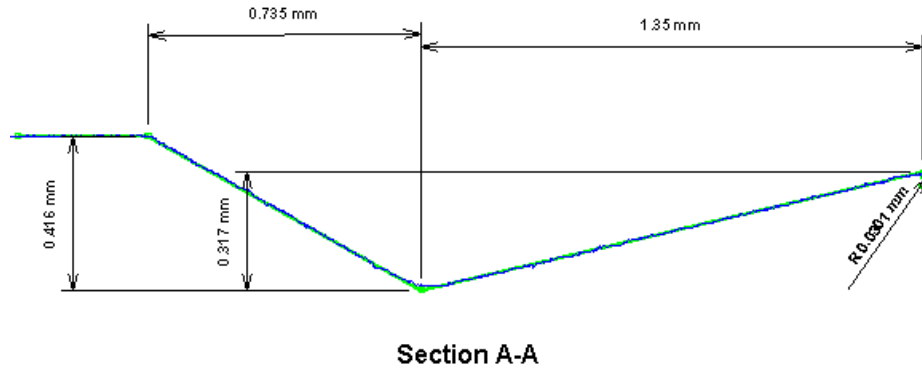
Dimensions of CNMG432-NL92 Insert along Section A-A
